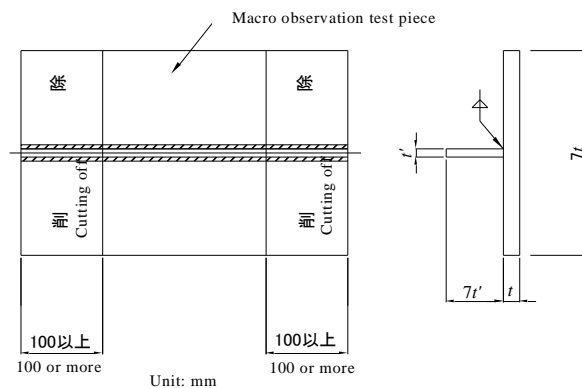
Specimen Used for Macro Observation for Fillet Welding
